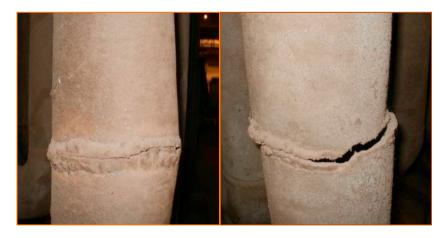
Damages to the entry part of the "W" burner pipe; cracks along the welded joint.
